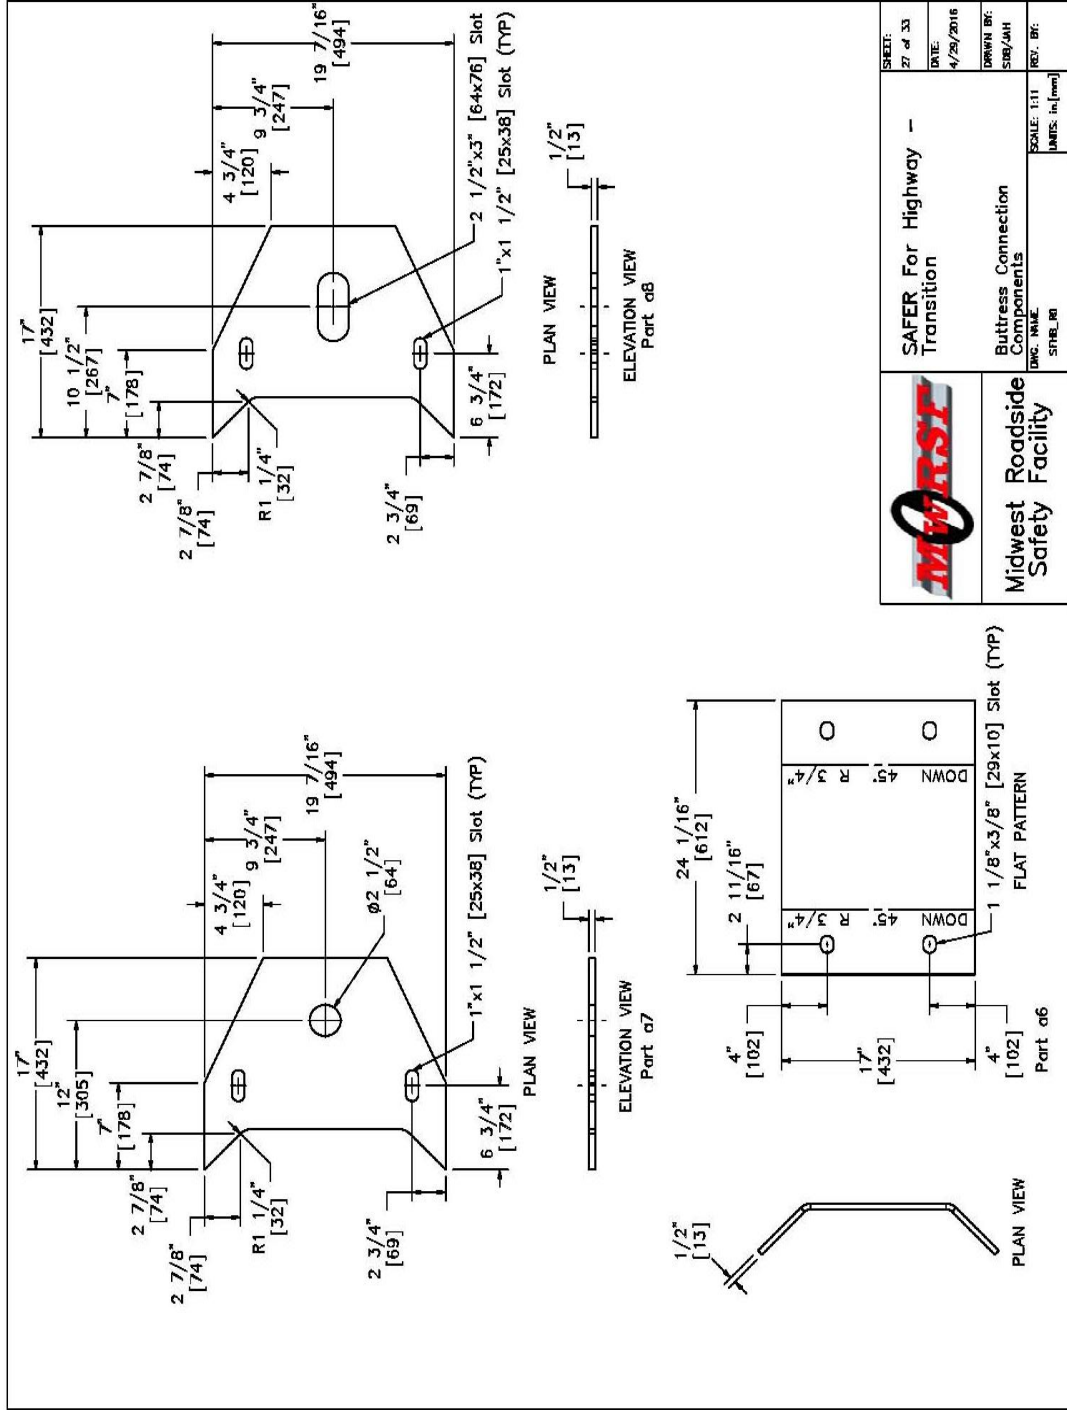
Buttress Connection Components, RESTORE Barrier Transition
